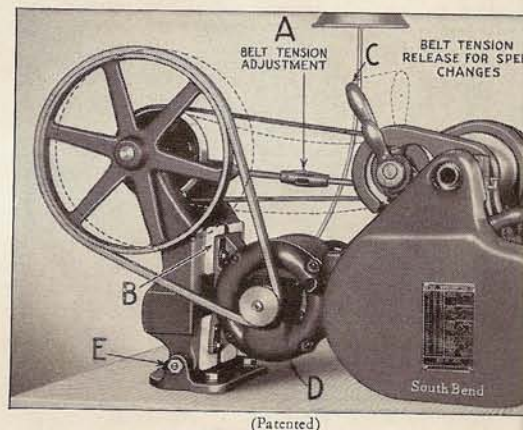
End View of "Workshop" Lathe with Horizontal Motor Drive Countershaft
